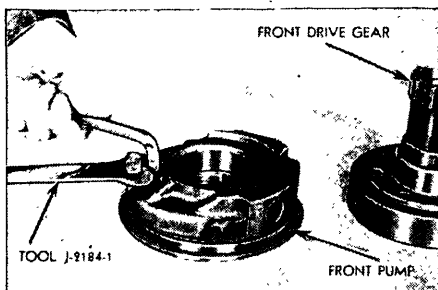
Remove front pump to cover attaching screw and take off cover. Tap lightly with soft hammer (if necessary) at dwell area on pump body but don't pry with screwdriver as this will damage lapped surface. When cover is removed, do not allow gears to drop out of place in body
